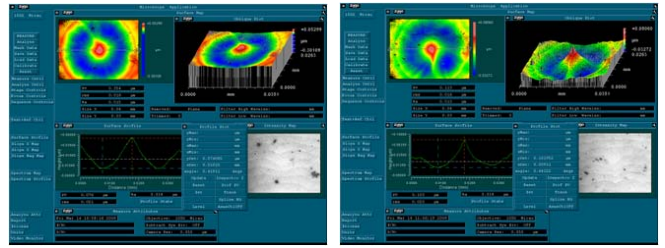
Measurement result of machined surface by compensation of microscope view (Zygo 3D profiler)
